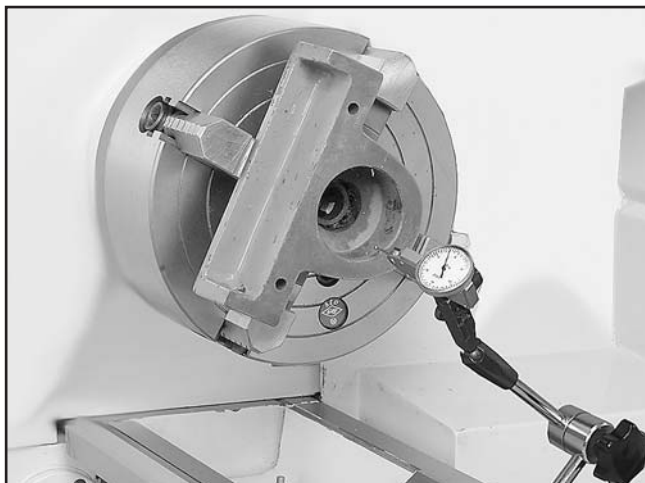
Example of aligning workpiece with a test indicator on a 4-jaw chuck.
